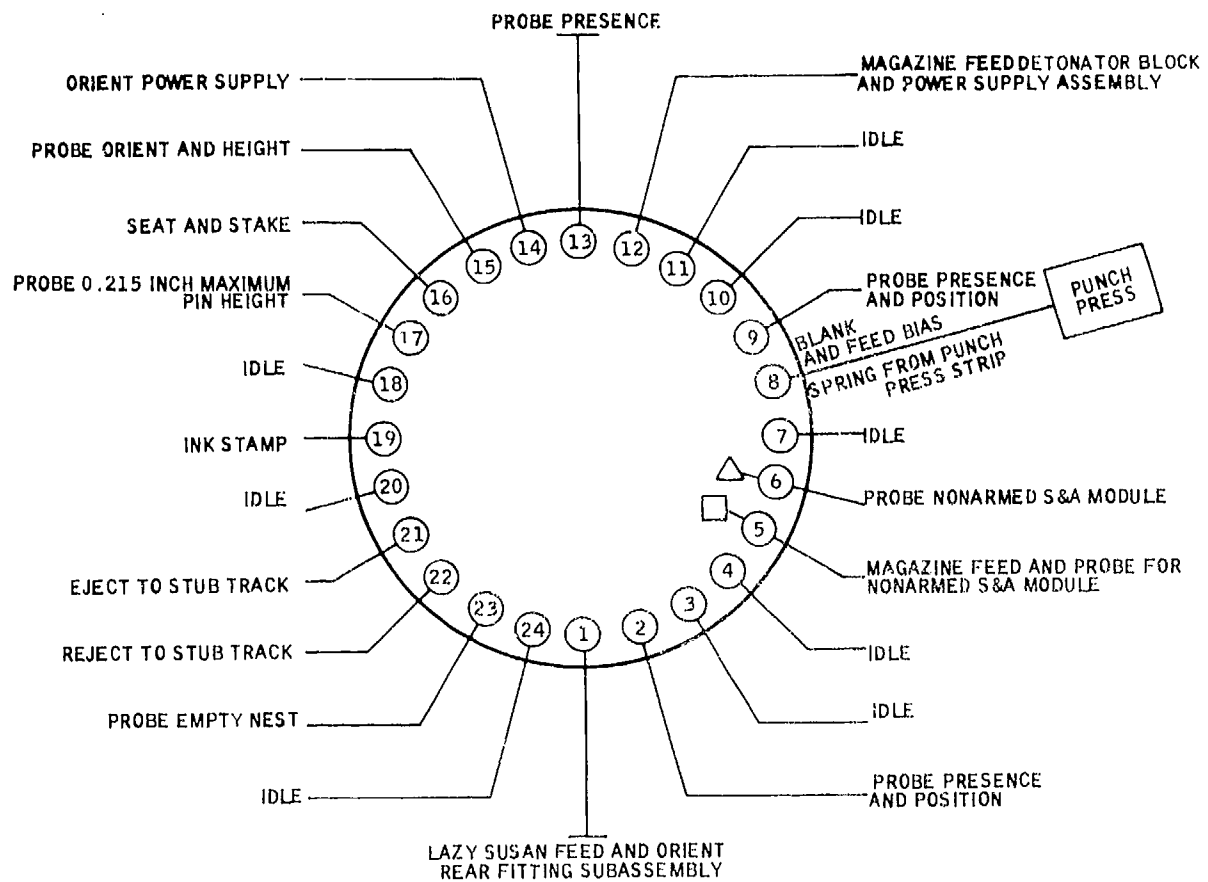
Dial schematic, machine F4 - rear fitting assembly operation 2
